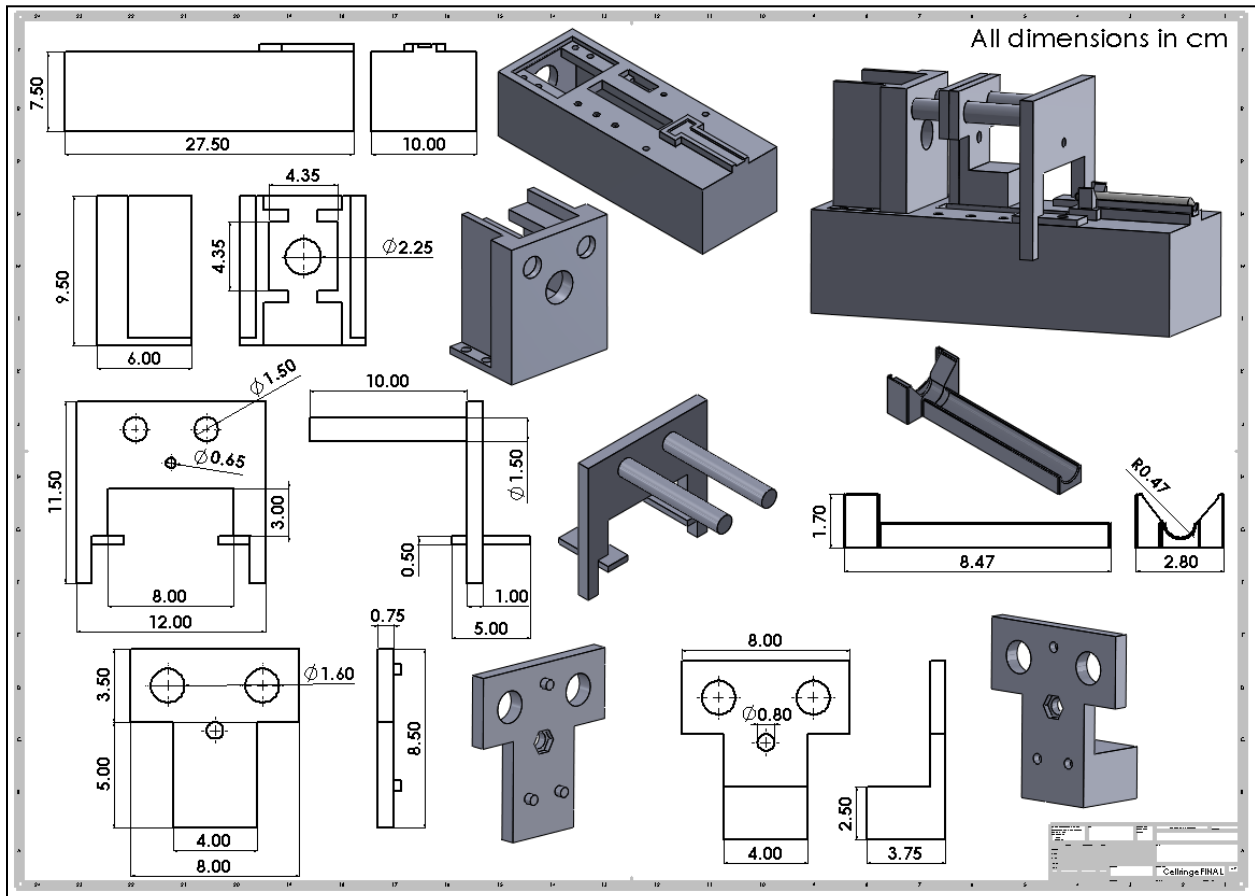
SolidWorks designs of individual components. Each piece is displayed and dimensioned, with the full assembly reference seen in the upper right corner. Individual pieces starting from the top to bottom: Cellringe Base, Motor Holder, Cylinder Rods (left), 1 mL Syringe Holder (right), Force Application Block pt. 1 (bottom left), and Force Application Block pt. 2 (bottom right).
